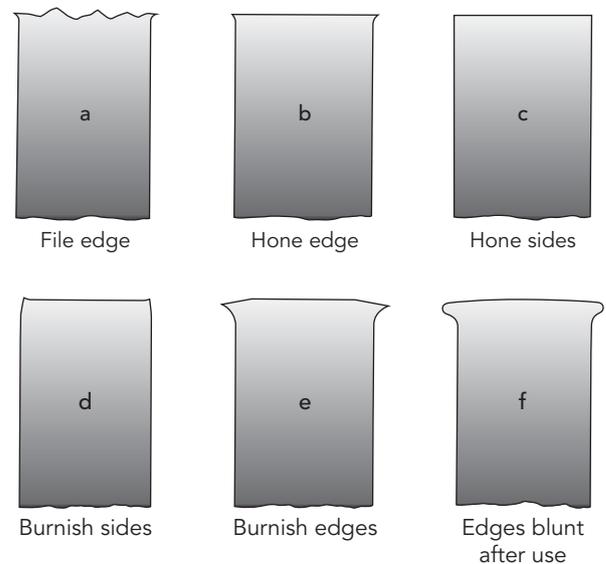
Sharpening hand scraper: a File edges straight and square with smooth file; file lengthwise; b Hone edge at 90° to face to remove file marks; lock wrist and use long stroke; c Hone sides on face of oilstone – this is the actual sharpening process; burnishing does not sharpen edge, but shapes it; d Burnish face flat; special burnisher shown was made from old rattail file, but back edge of gouge or nail punch is satisfactory; e Hold scraper in hand or vice and burnish edges at 5–10° to form burr; hand scraper may have eight cutting edges, which, if properly sharpened, should remove shavings, not merely dust.
